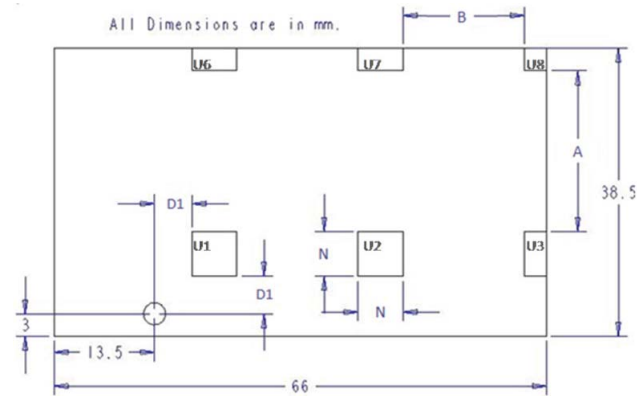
Dimension parameters for a quarter part of the modified JEDEC board.
